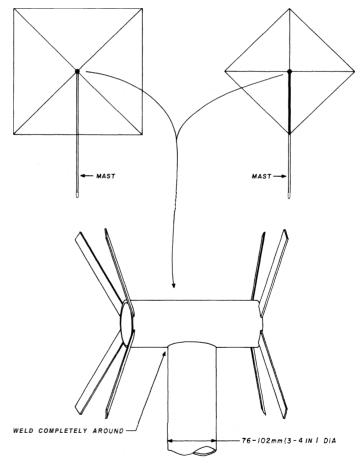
Method of welding spider-to-mast section to obtain a square or diamond-shaped quad.
